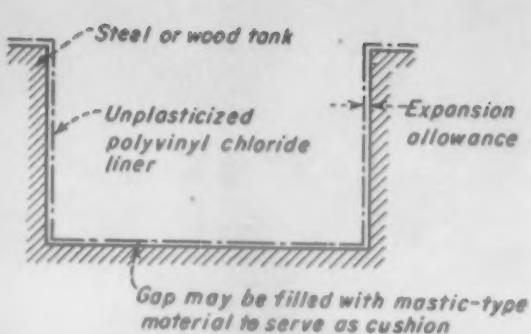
General arrangement of tank liners made from rigid polyvinyl chloride sheet.
